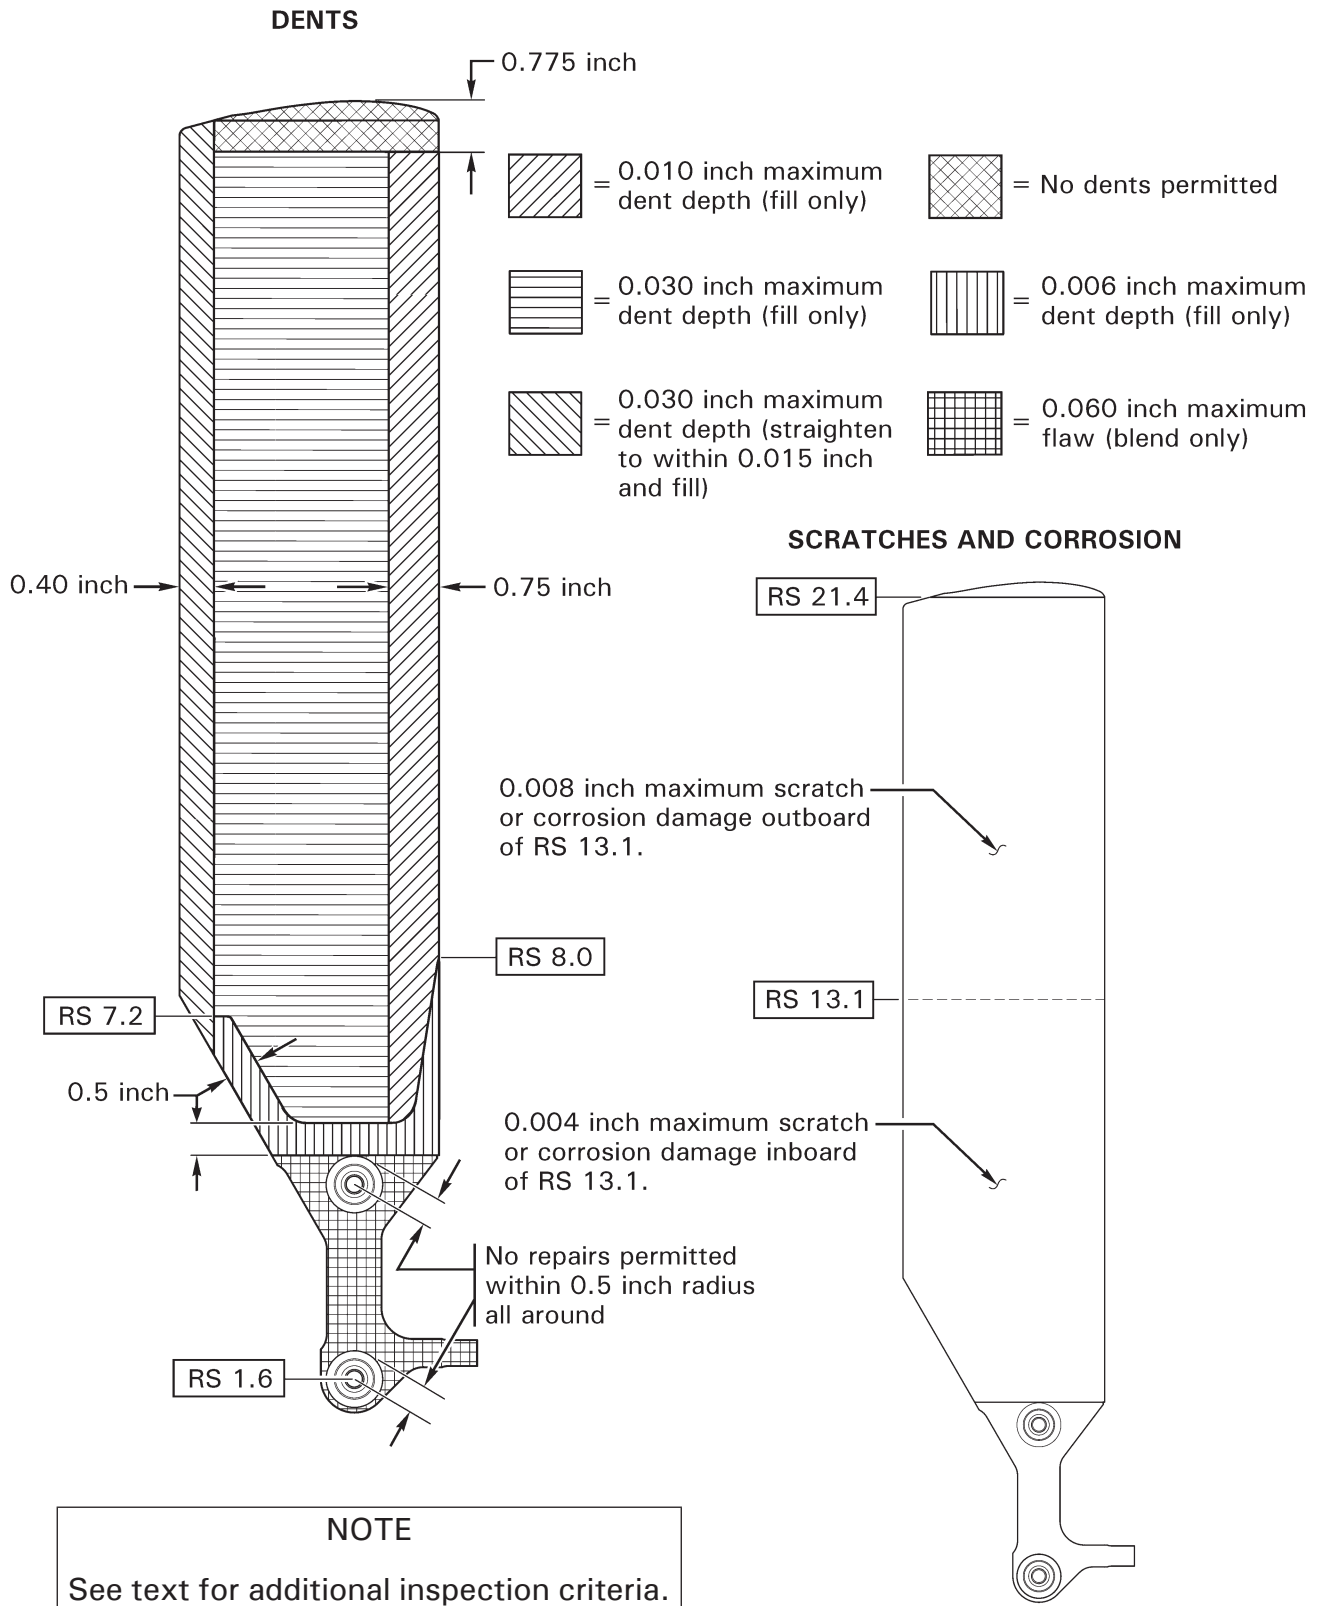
TAIL ROTOR BLADE INSPECTION CRITERIA
